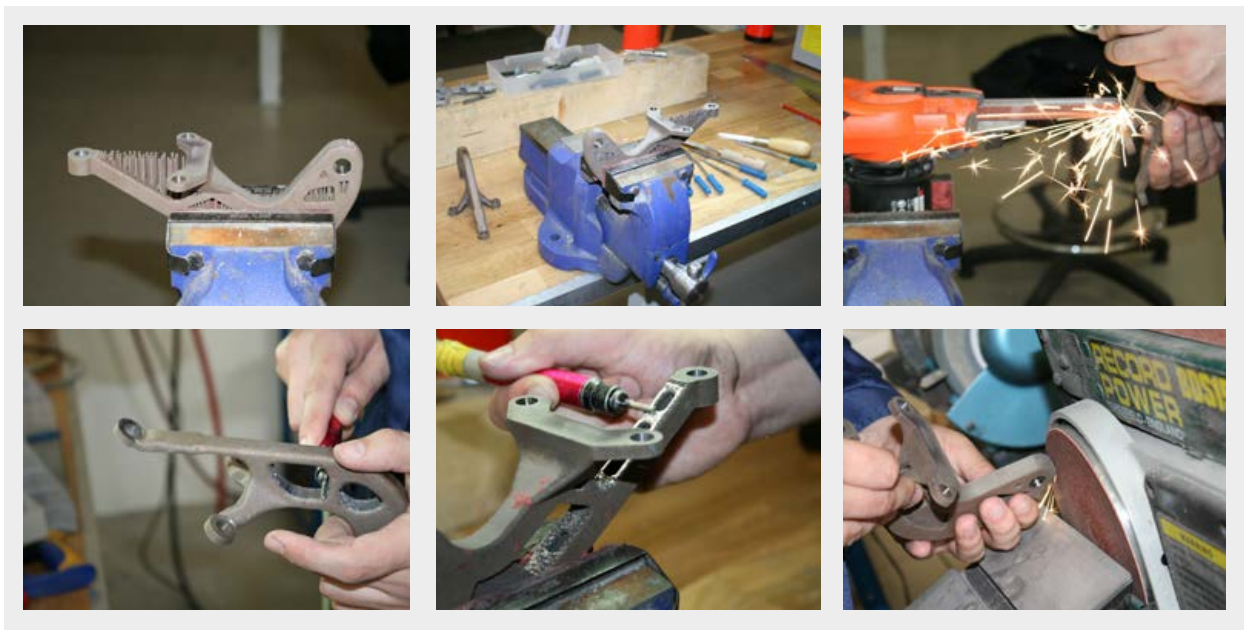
Clean-up: manual fixture removal and clean-up of witness marks
